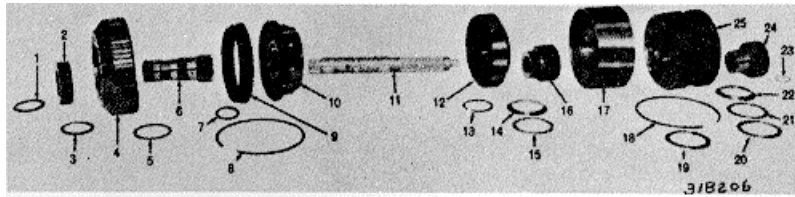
Components of gear unit and main shaft assembly (HT750CRD)
